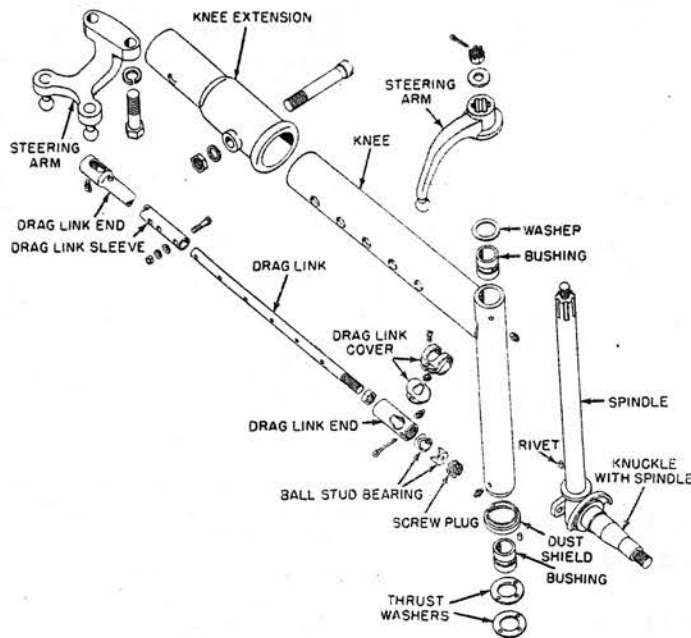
E Exploded view of knee assembly on tractors with wide tread front end. Models 50, 60
